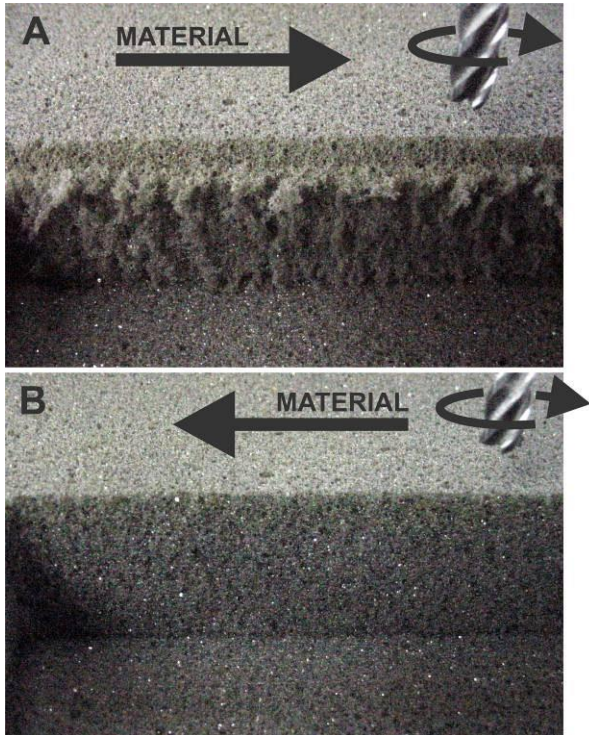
(A) Climb cut and (B) Conventional cut surfaces
